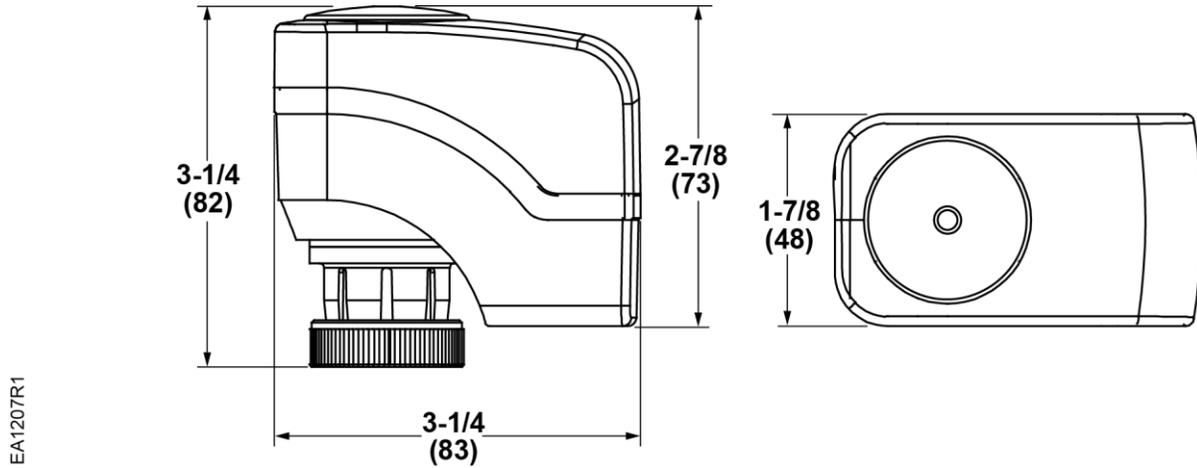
SSD61U/SSD81U Actuator in Inches (Millimeters).
